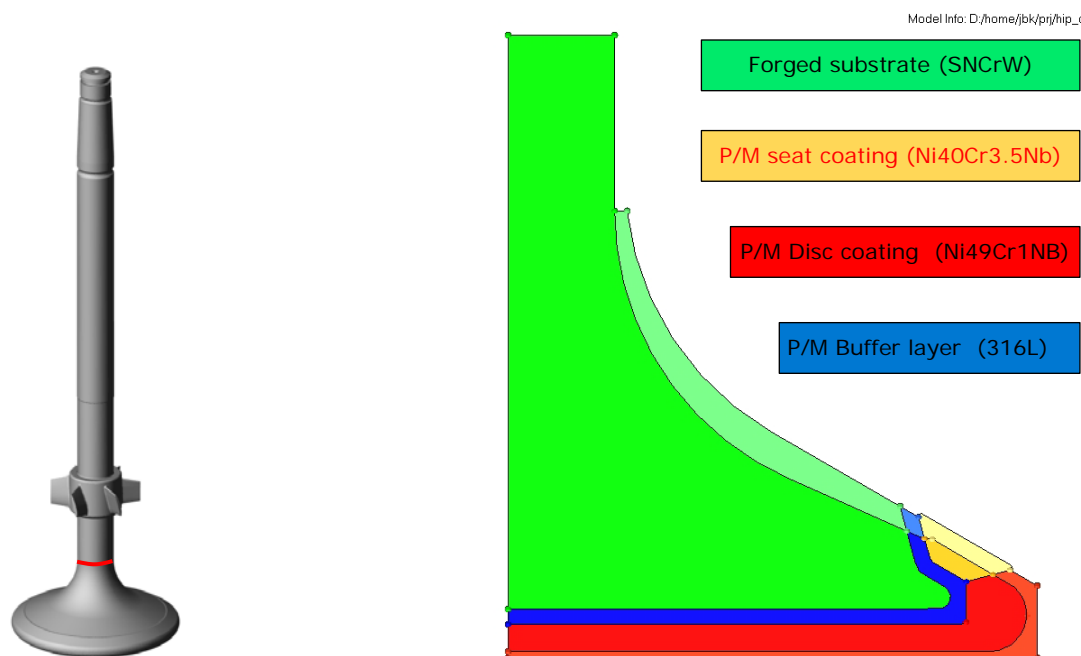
Friction welded spindle and HIP compound capsule elements
